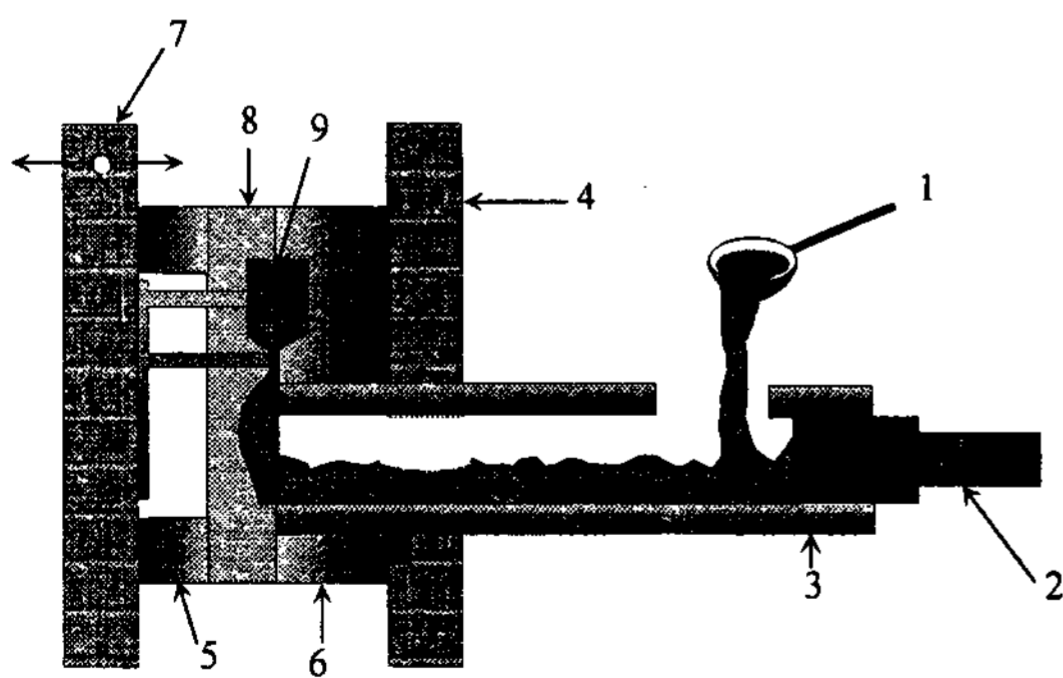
Schematic of a cold-chamber die casting machine: ① pouring ladle, ② Plunger ③ Sleeve, ④ Stationary platen, ⑤ Ejector box, ⑥ Stationary die, ⑦ Sliding platen ⑧ Ejector die and ⑨ Cavity.
